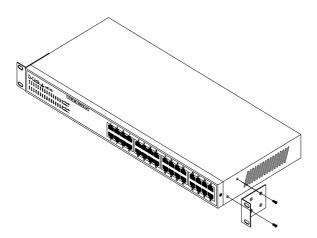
Attaching the mounting brackets to the 10/100 Fast Ethernet DES-1032
